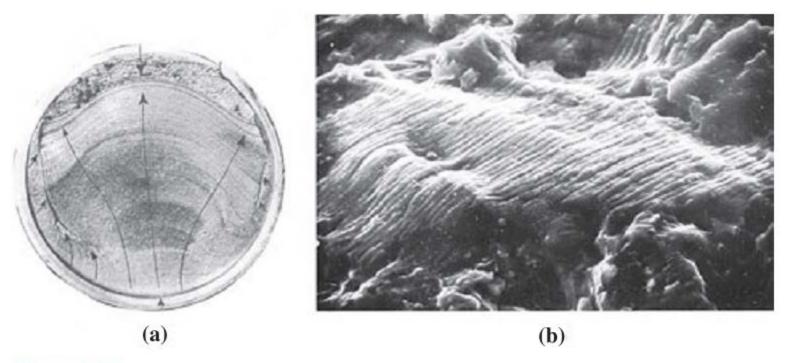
Fatigue fracture surface. (a) At low magnifications, the beach mark pattern indicates fatigue as the fracture mechanism. The arrows show the direction of growth of the crack front with the origin at the bottom of the photograph. (*C. C. Cottell, "Fatigue Failures, with Special Reference to Fracture Characteristics,"* Failure Analysis: The British Engine Technical Reports, *American Society of Metals, 1981, p. 318. Reprinted with permission of ASM International. All rights reserved. www.asminternational.org.*) (b) At very high magnifications, closely spaced striations formed during fatigue are observed (× 1000). (*Reprinted Courtesy of Don Askeland*)
